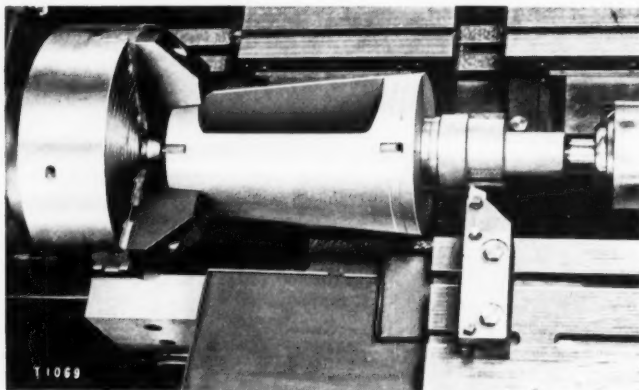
Close-up of tooling for turning stem of tapered valve plug.
